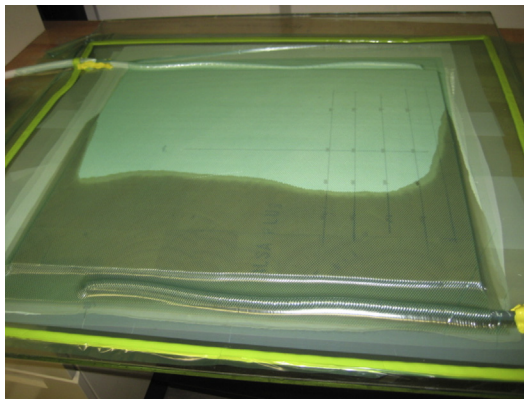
Resin running through a sample using the vacuum-assisted resin transfer molding technique.
